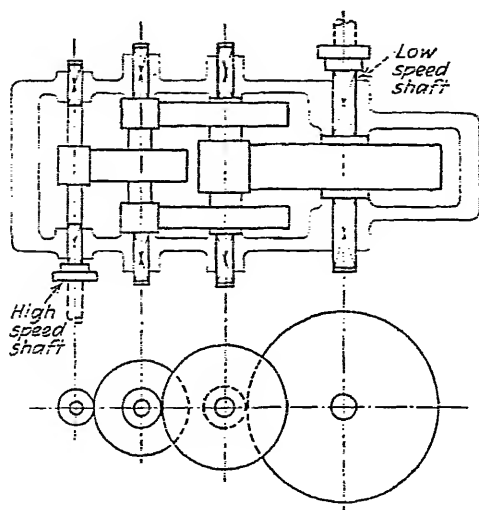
Arrangement of balanced gearing in triple-reduction gear unit.
